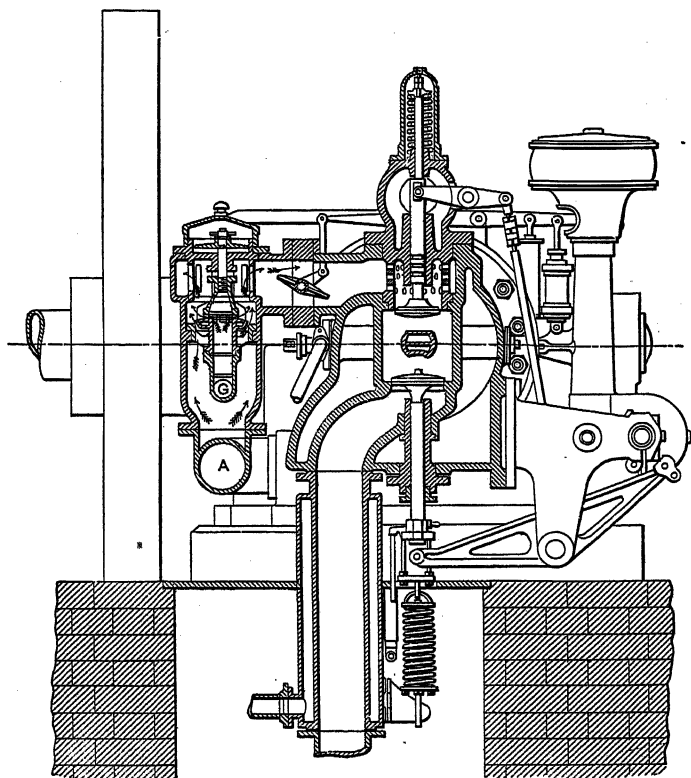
Koerting Valve Gear. Transverse Section through Combustion-Chamber.
